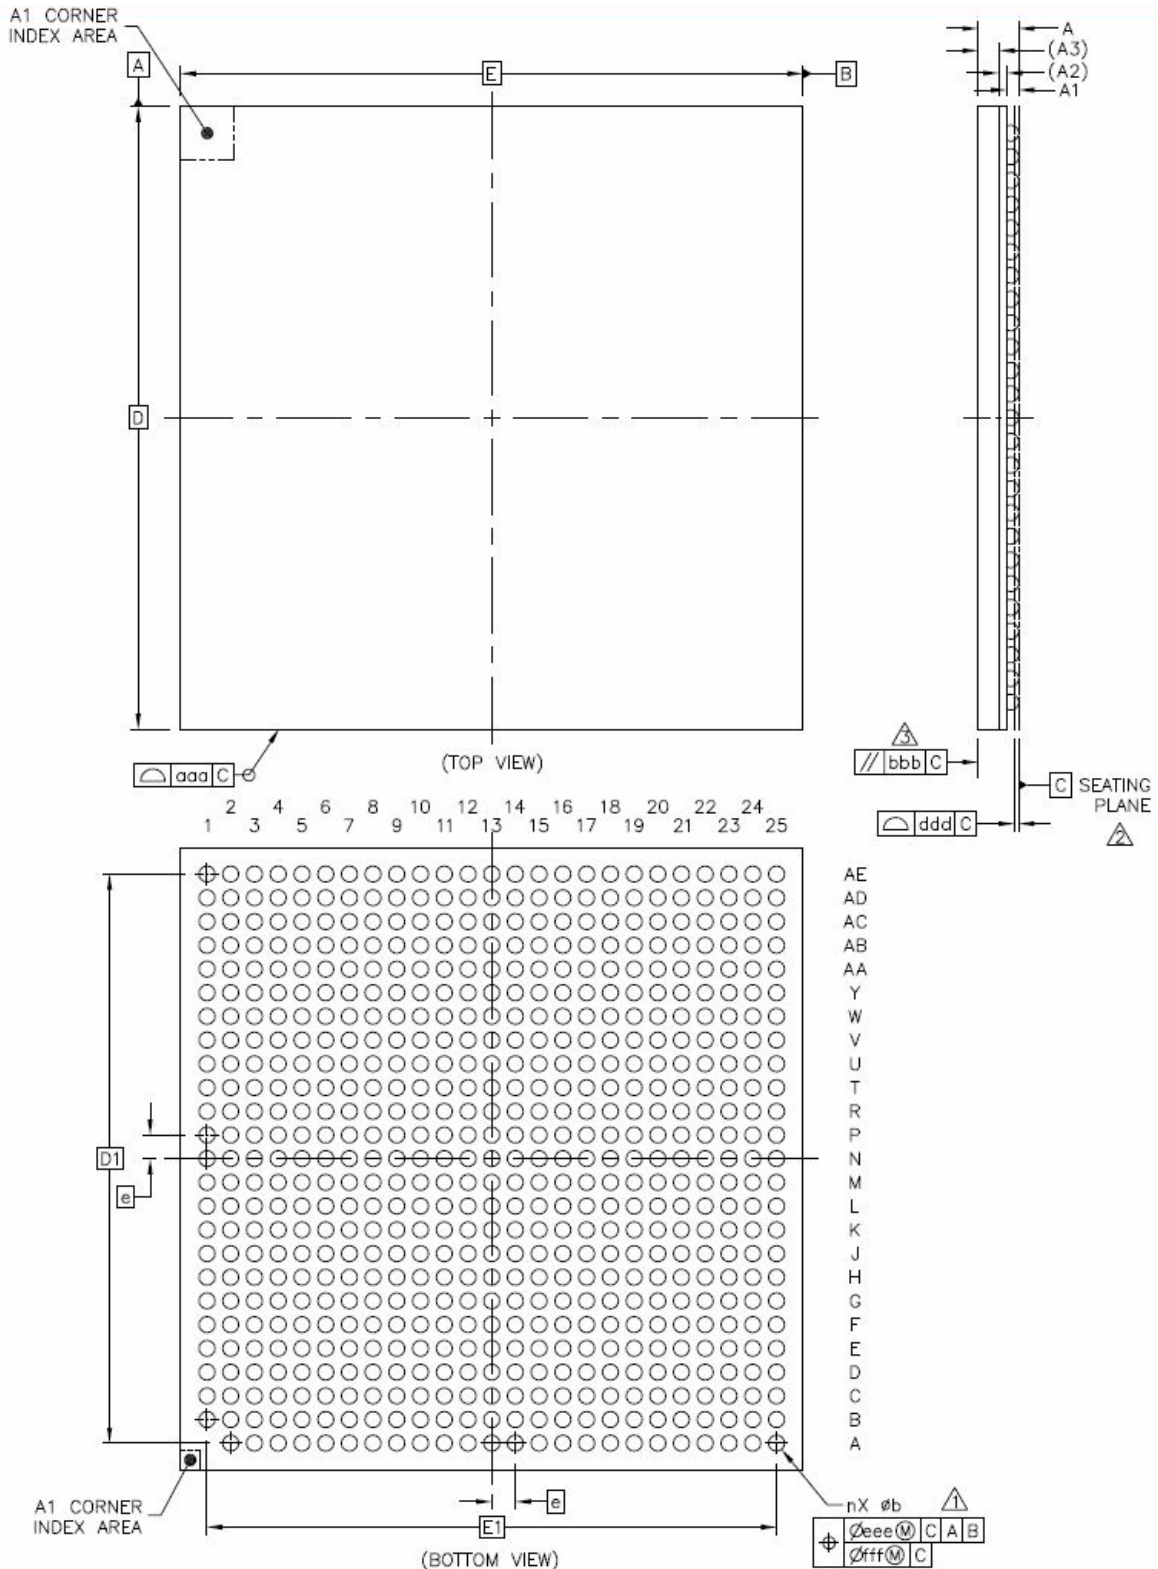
21 x 21 mm BGA, Case 2240 Package Top, Bottom, and Side Views
